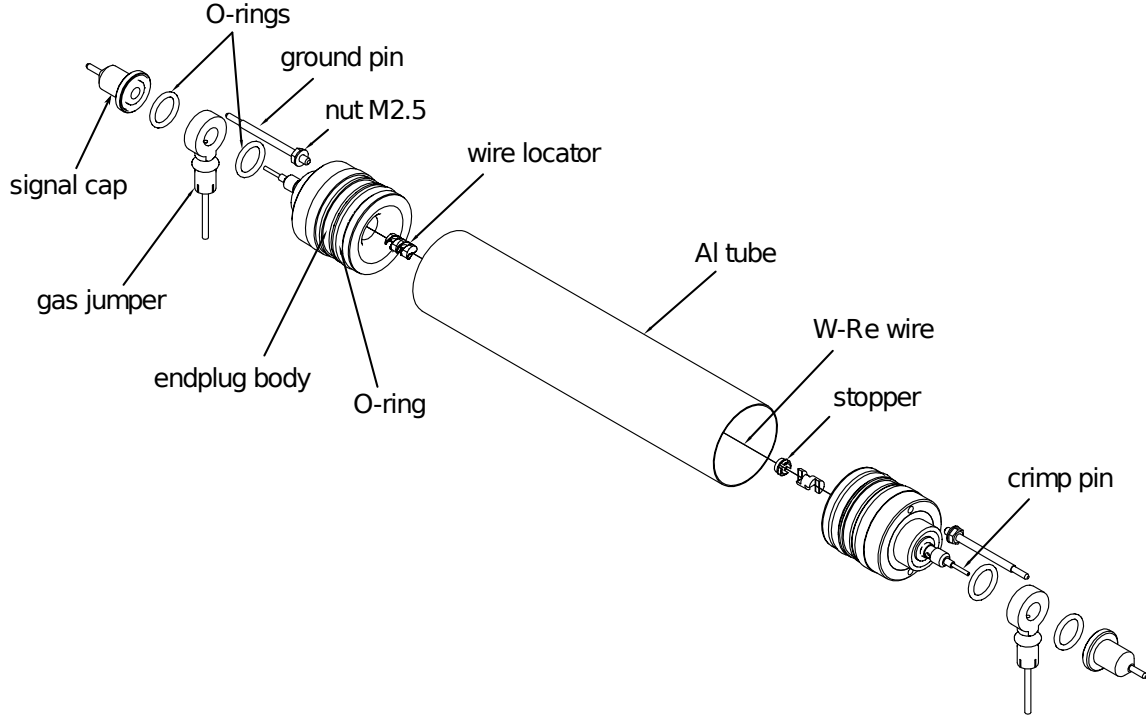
Exploded view of a drift tube of the ATLAS MDT chambers. [24]
